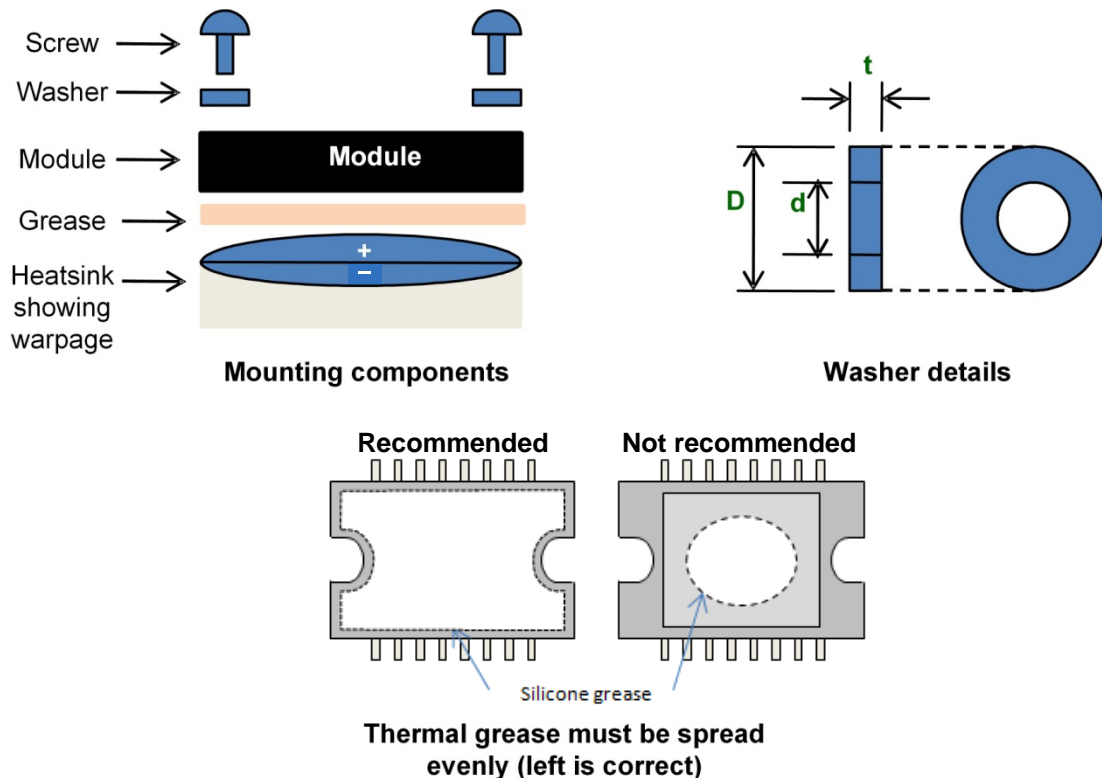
Module mounting details: components; washer drawing; need for even spreading of thermal grease
